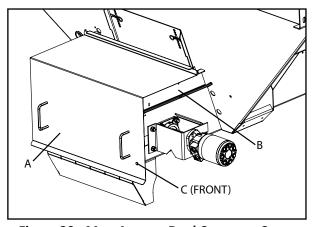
MULTAPPLIER Dual Conveyor Cover
